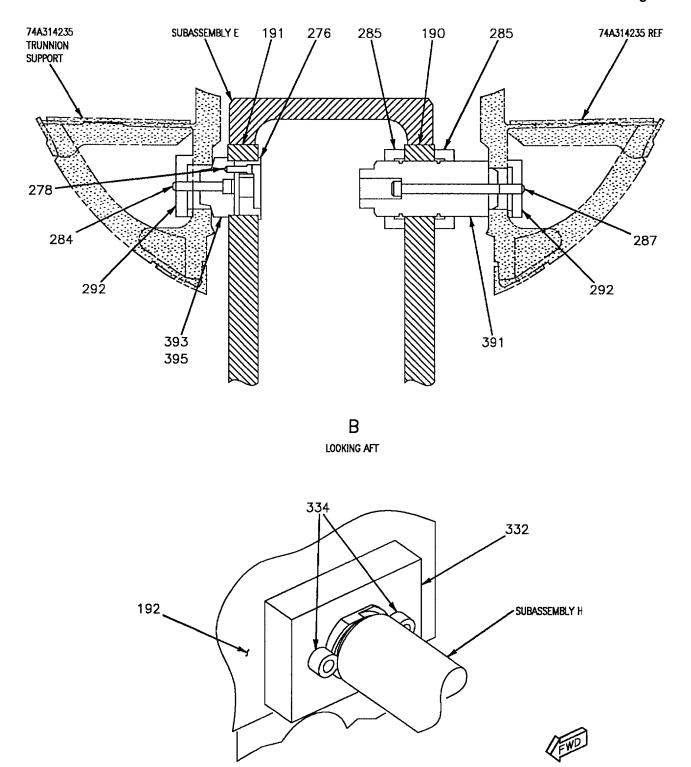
Drag Brace Third Oversize Sleeve Installation (Sheet 3)
